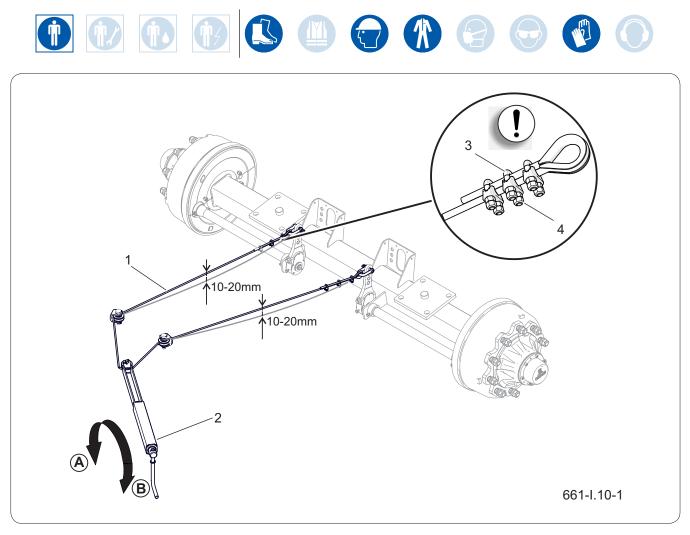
Cable tension adjustment(1) cable,(2) brake mechanism,(3) bow clamp,(4) clamp nut(3) bow clamp,
